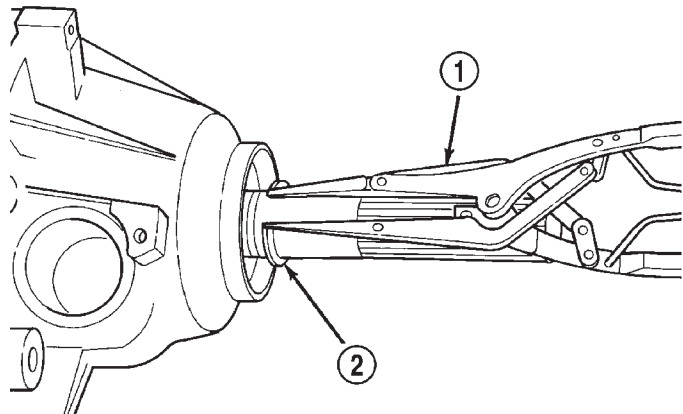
Output Shaft Rear Bearing Retaining Ring
